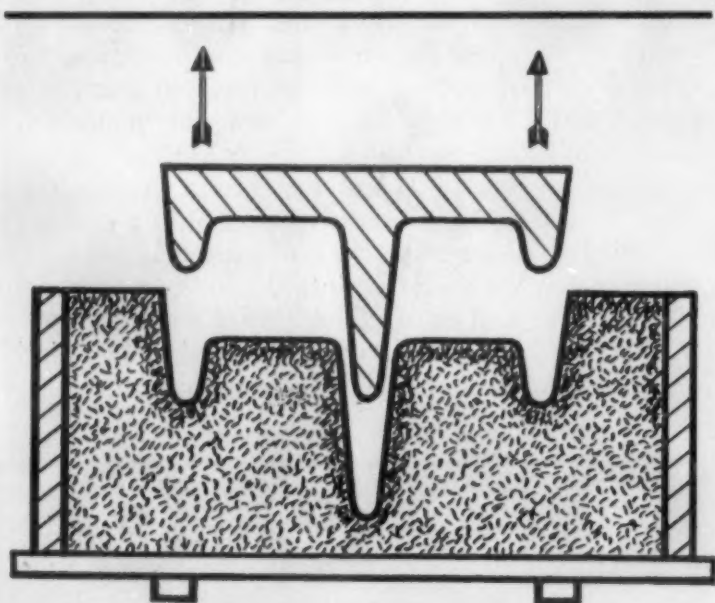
This pattern has ample draft, hence it strips easily from the mold.
